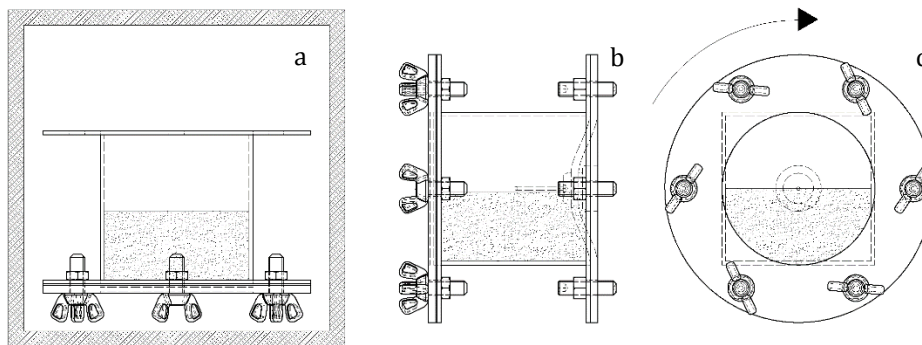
Rotomolded blends directly-mixed within the mold cavity and dried inside a vacuum oven [a]; sealed mold cavity affixed to the rotating axle [b]; mold enclosed inside the rotomolding oven rotating at 4 RPM until $PIAT = 235$ °C [c].
